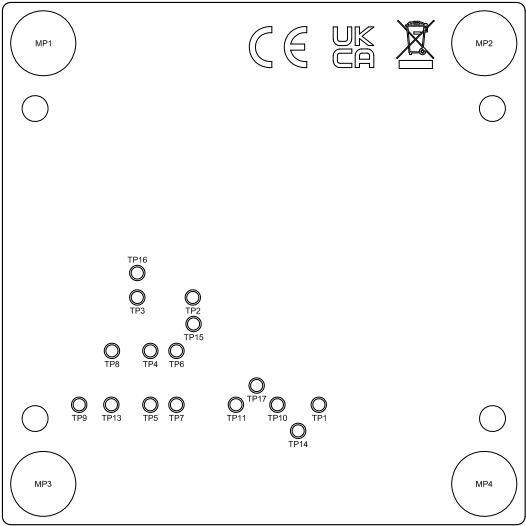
nPM Fuel Gauge Board (PCA63563), back view
